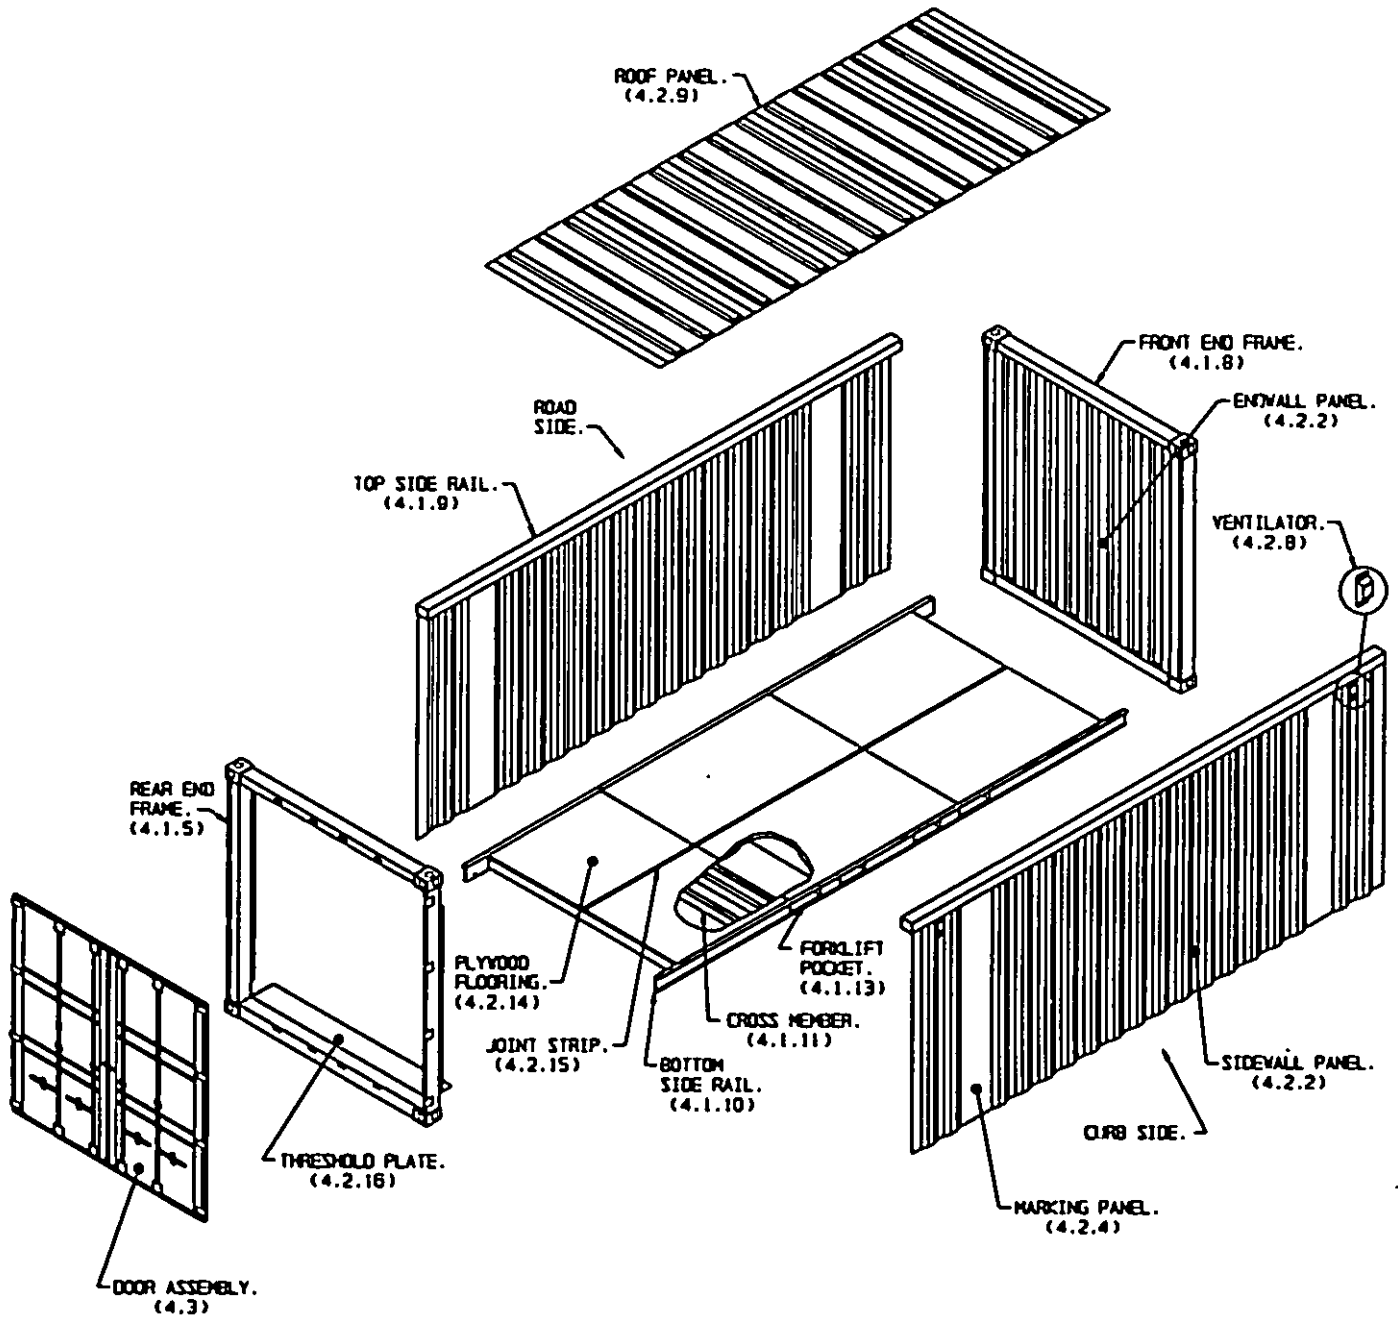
A - TYPICAL STEEL CONTAINER (EXPLODED VIEW)
